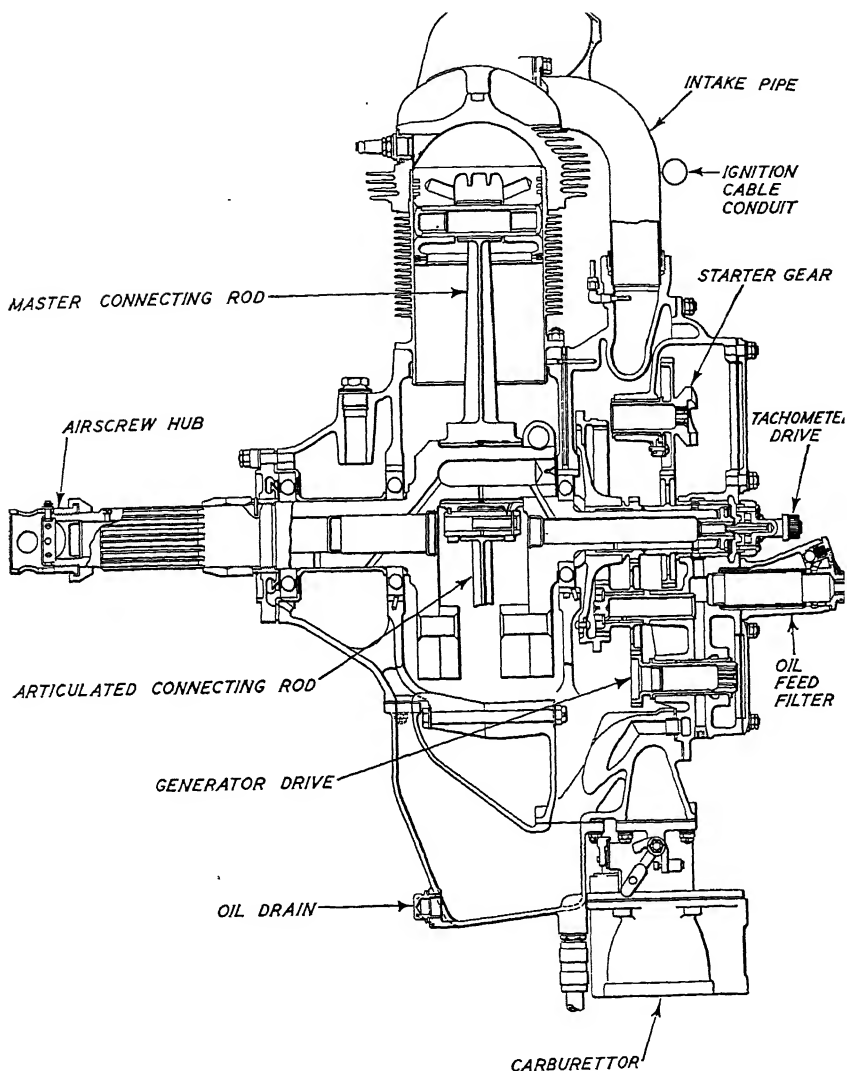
SECTION THROUGH CONTINENTAL "W670" ENGINE
